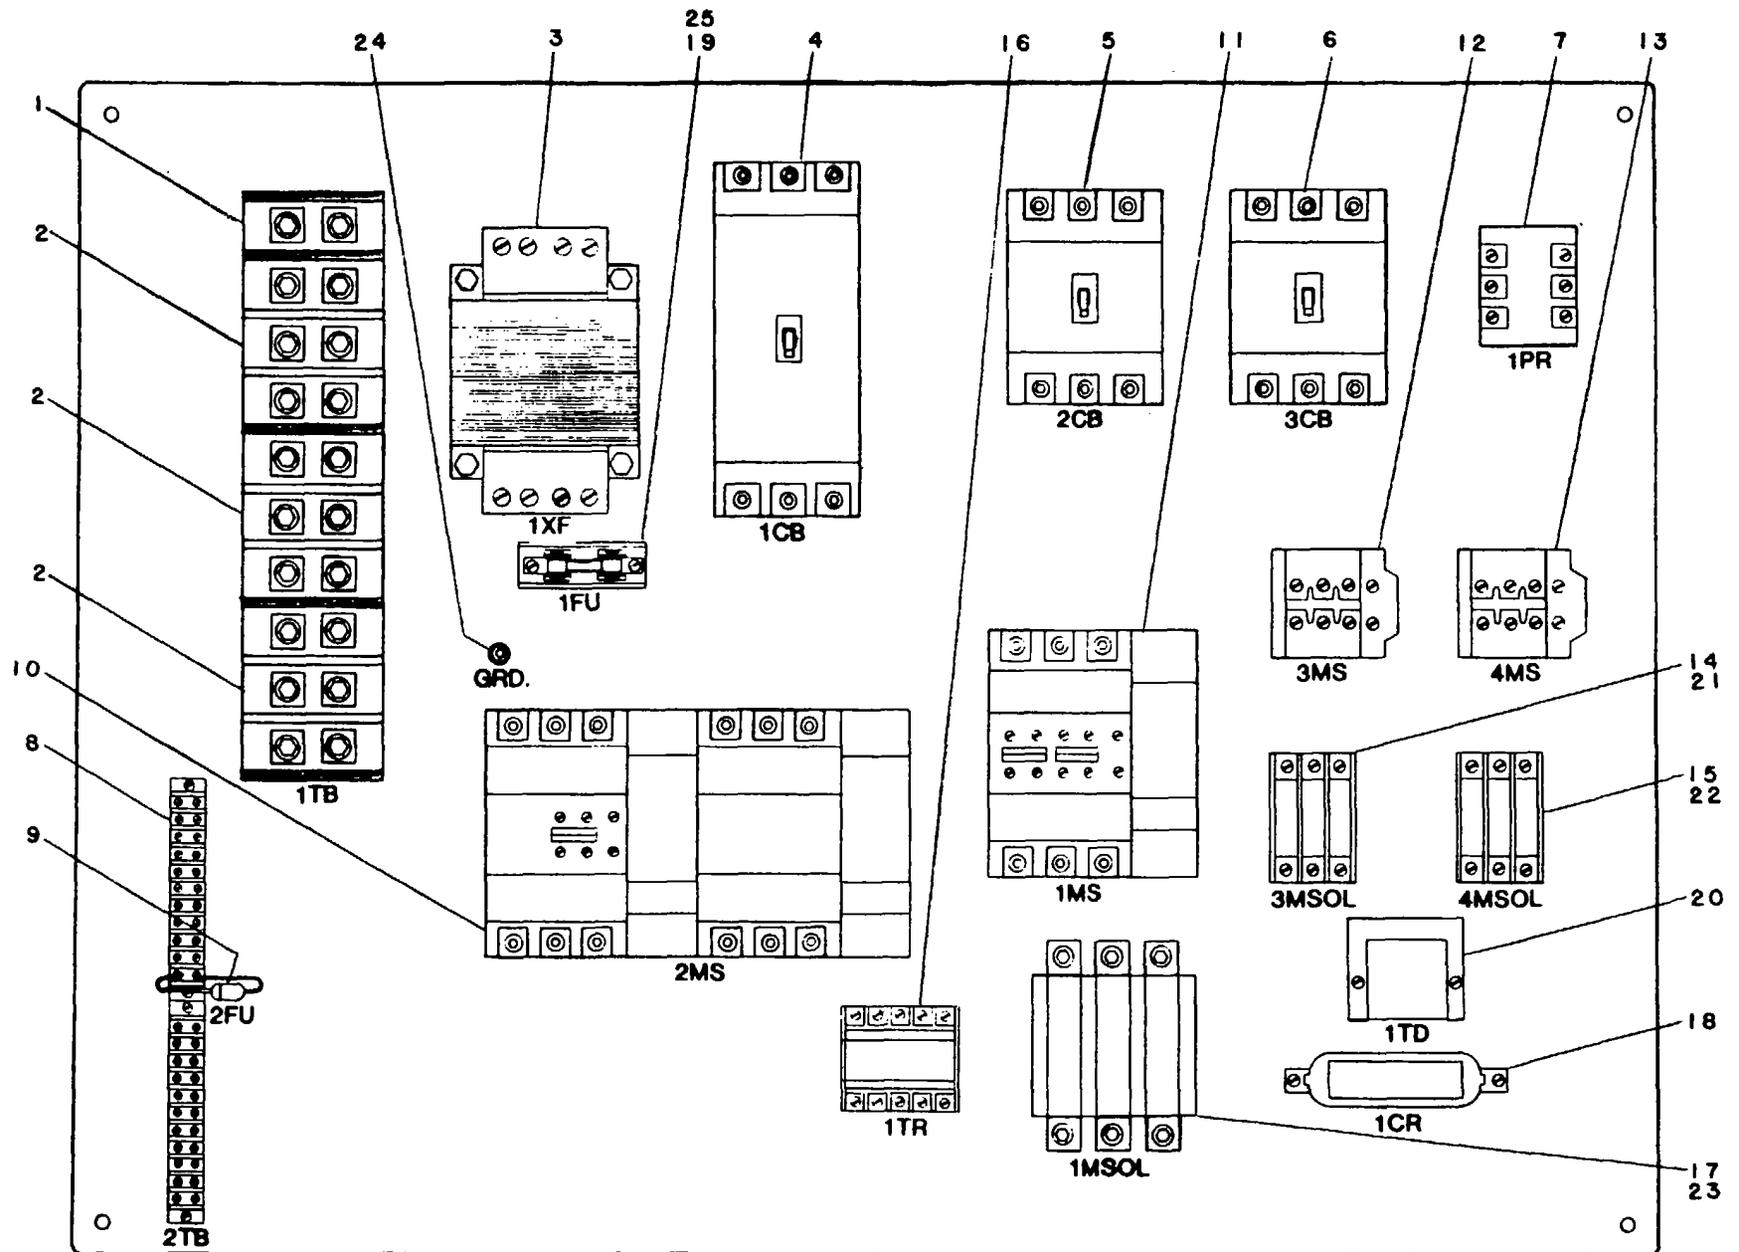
ELECTRICAL COMPONENTS PANEL ASSEMBLY
